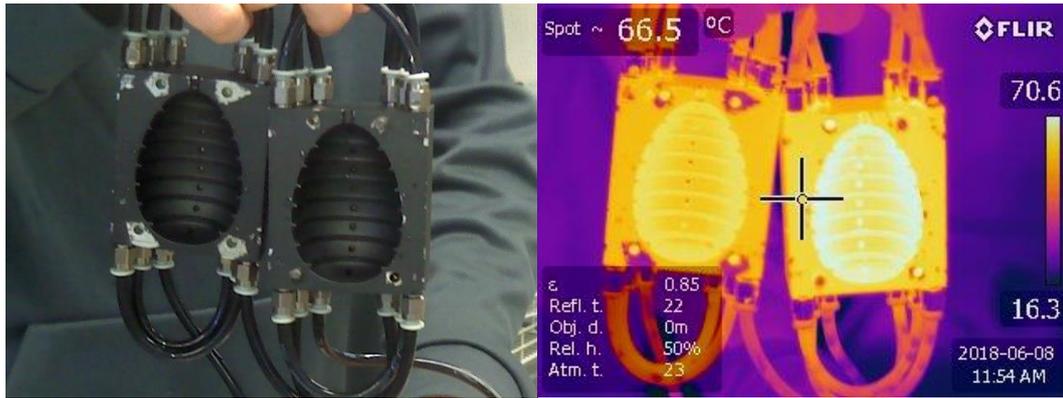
(left) Mould version 3 – (right) Mould under thermal camera image 1
